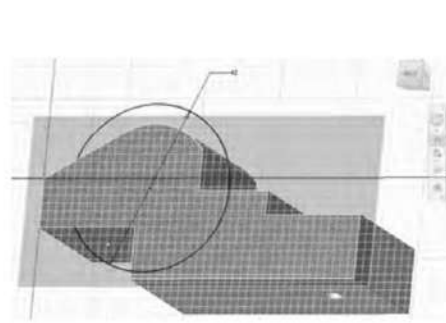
The new sketch plane and sliced part for construction purpose only. The edges are projected on to the sketch plane to be used for extrusion
